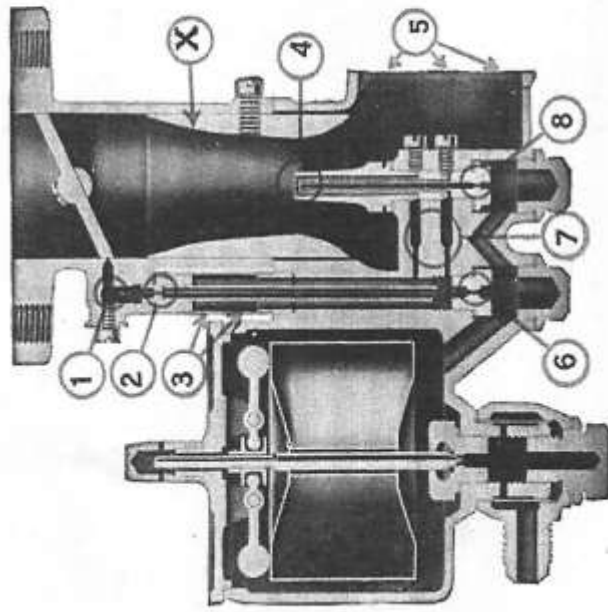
Sectional view of the Zenith model "U" carburetor.
